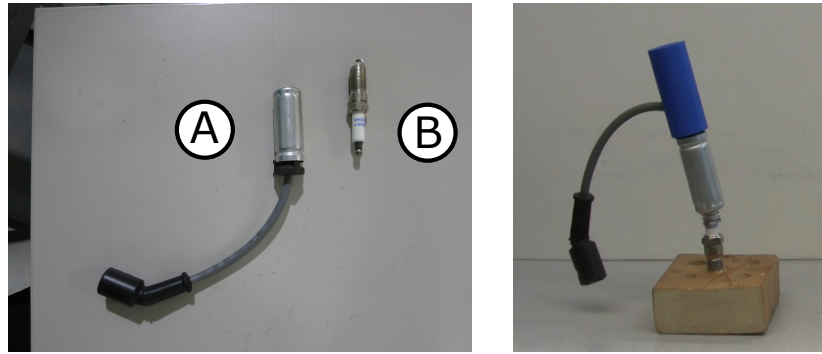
The two parts involved in the spark plug assembly task. On the left is the cable (part A) and on the right is the spark plug (part B). The result when A and B are assembled is shown on the right-hand side picture.
